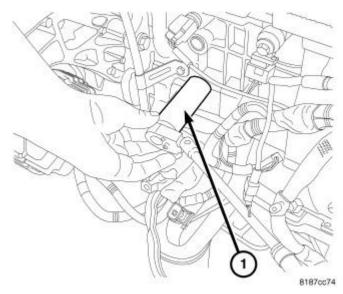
Rear Seal Guide, Rear Oil Seal & Crankshaft Courtesy of CHRYSLER GROUP, LLC
